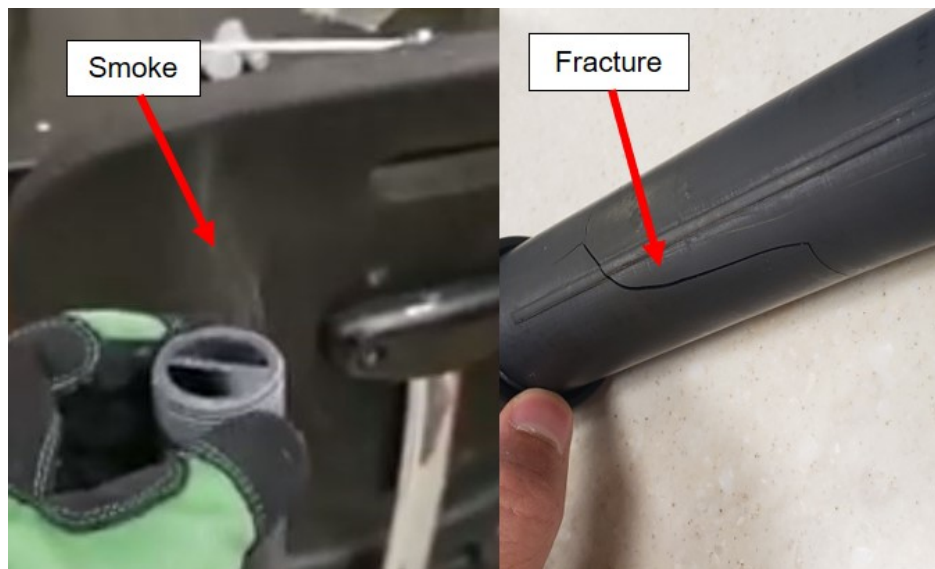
SLA printed test section with smoke (Left) and fracture (Right).
